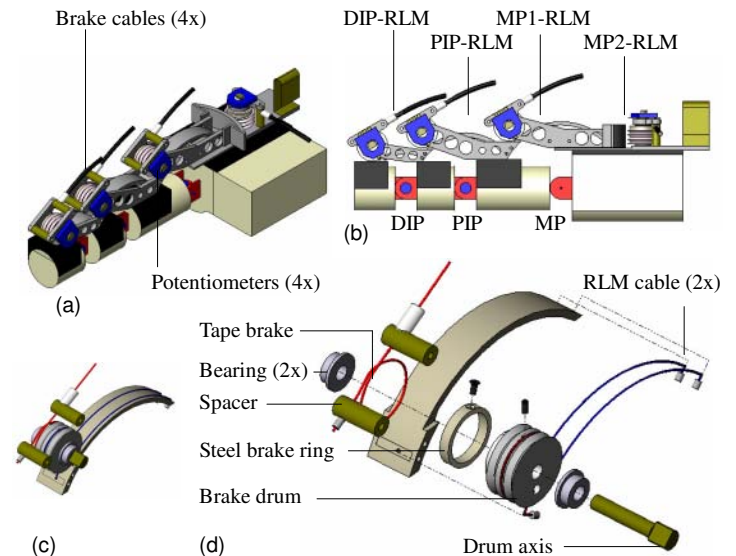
Concept B: (a) exoskeleton with stretched finger model, (b) side view, (c) RLM with brake cable and spacers, (d) exploded view of the RLM with its main components.
